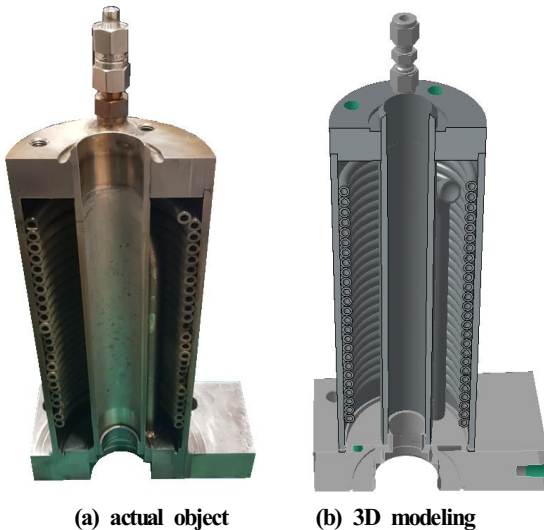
Result of reverse engineering for drive head flange & heater fluid coil
